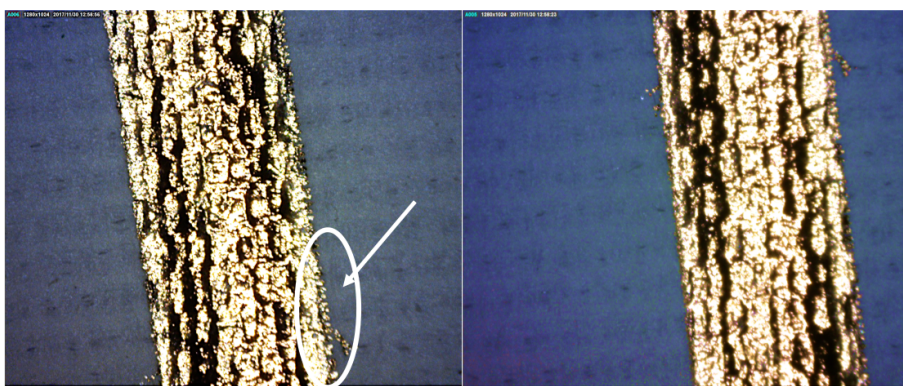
Prototypes printed on DHJ PEARL 110 μm Microscope zoom
